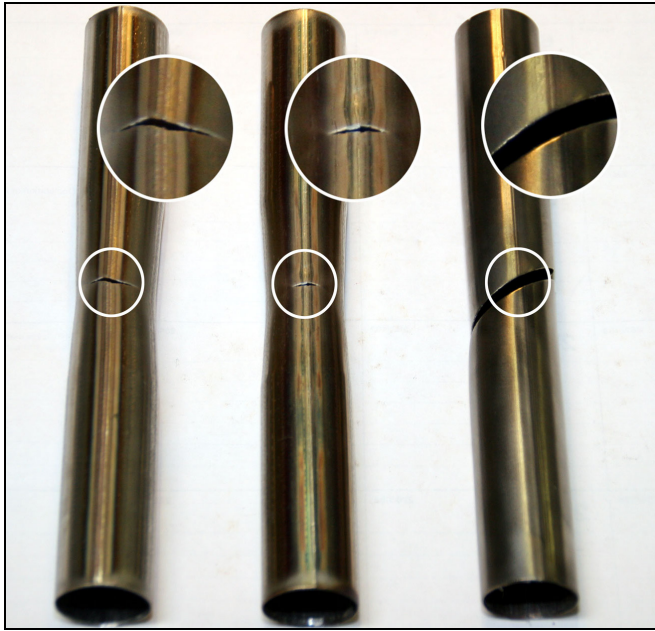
Typical tensile test tube specimens. From left: as welded; cooling-controlled; C.C. Q+T hardened.
